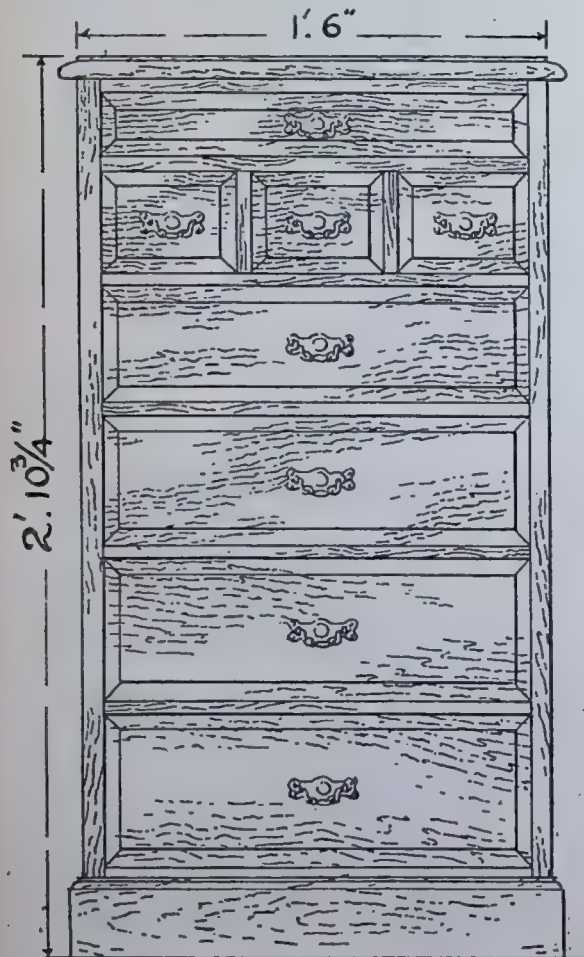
ANGLER'S CABINET. FRONT VIEW.
